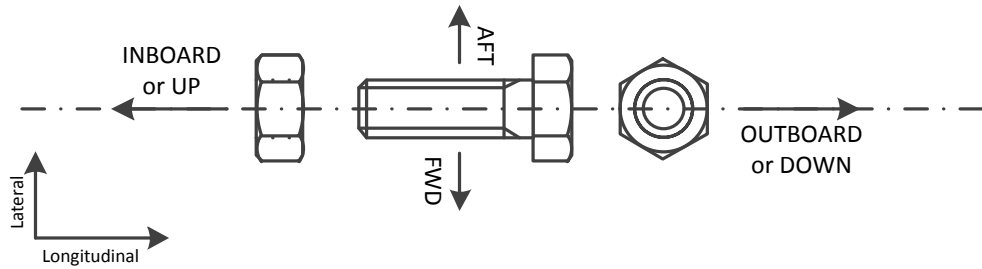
The orientation of nut and fastener (or push rod or rod end bearing in this case) for the measurement purposes
